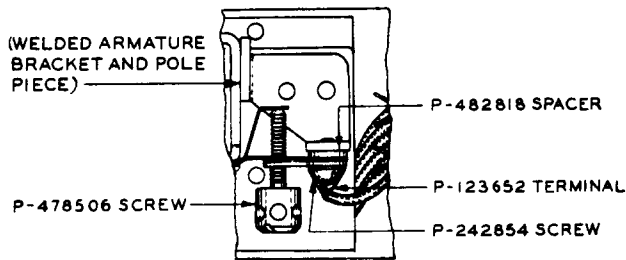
A - 267-TYPE AND D-175787 RELAYS EQUIPPED WITH WELDED ARMATURE BRACKET AND POLE PIECE.
